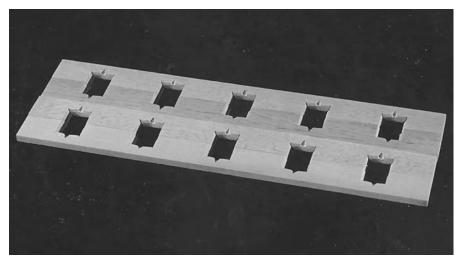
Patterns of assembled pieces can vary depending on how you strip-cut the pieces. A mortising chisel was used to drill the holes.
